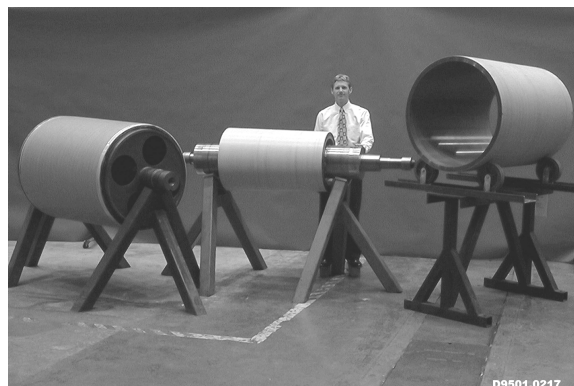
Flywheel components during final assembly (engineer B. Sledge pictured)
